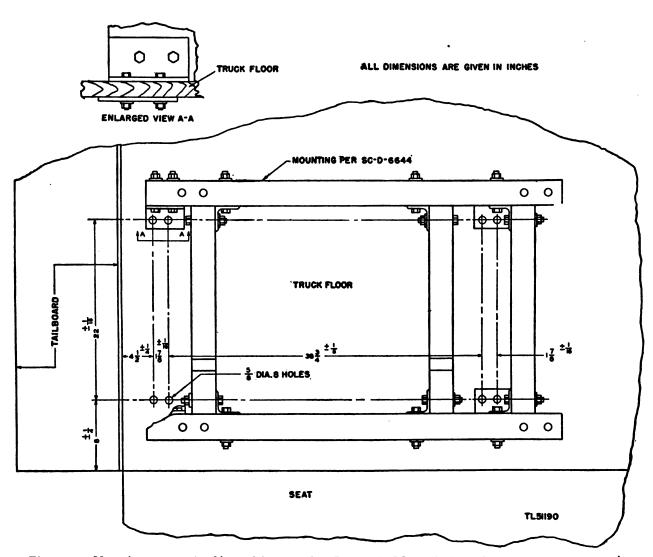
Mounting centers for kit used in mounting Reel Unit RL-26-() on 34-ton 4x4 weapons carrier.
